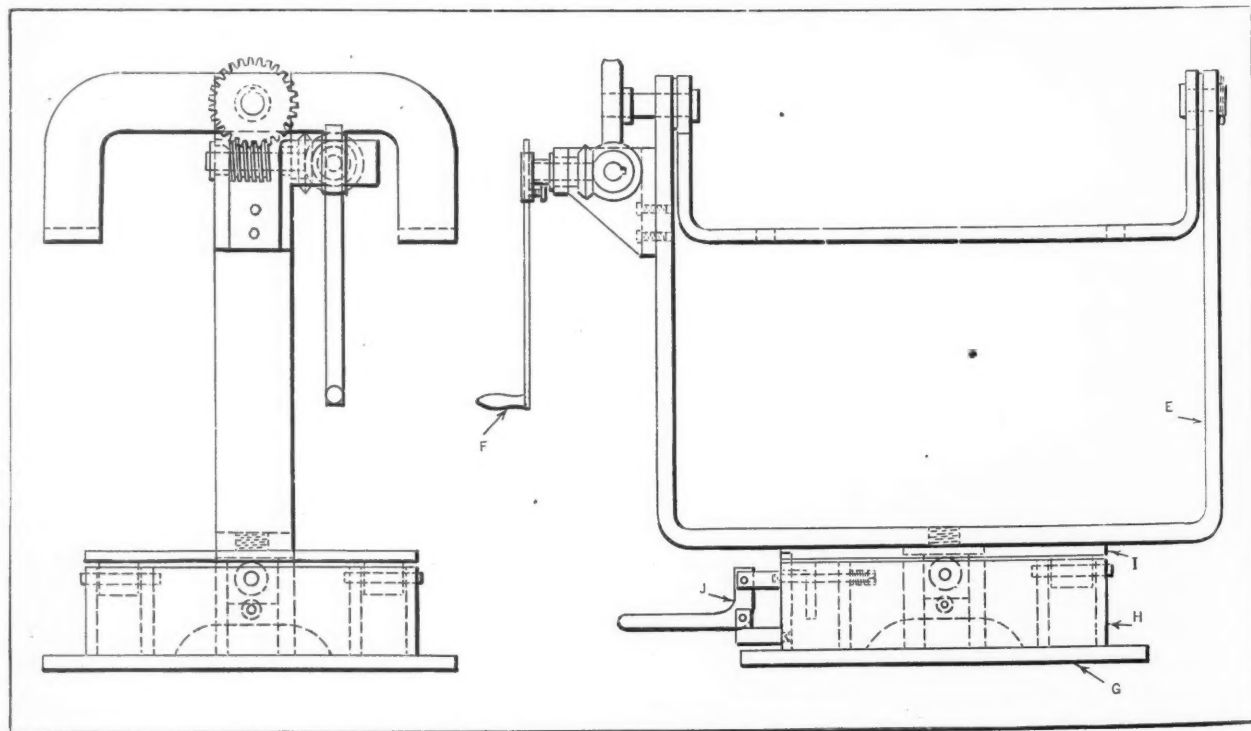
Assembly Views of Racks Shown in Figs. 1 and 2
